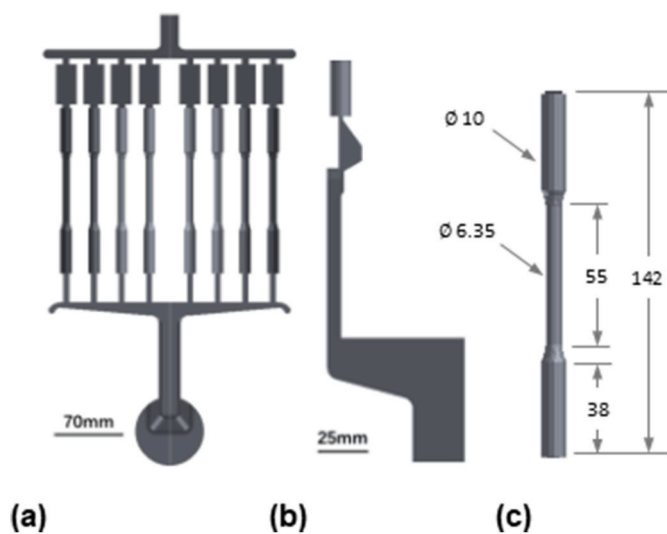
Die geometry used to produce ASTM standard E8/E8M tensile specimens [24]. (a) Front view. (b) Side view of runner-orifice system. (c) Schematic of tensile specimens (all dimensions in mm).
